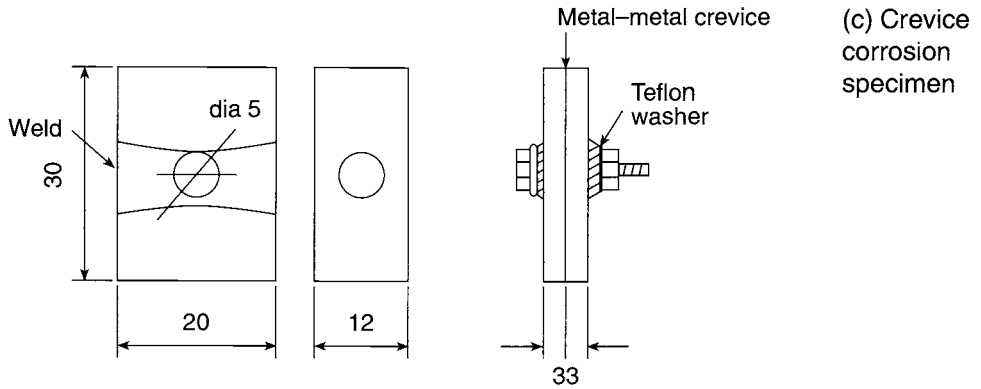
(Continued) Schematic illustration of the test specimens used to evaluate mechanical properties and corrosion performance of welded joints.
